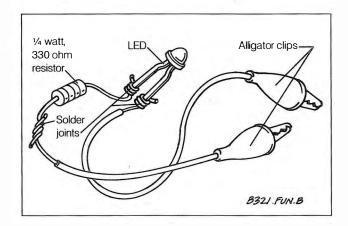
Do-it-yourself LED test light for safe testing of ignition, fuel injection, and emission control circuits.
